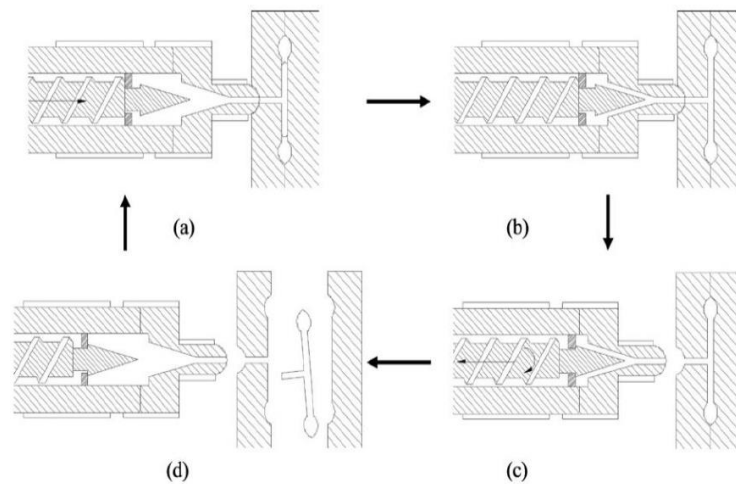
Cycle time, (a) Close mold, (b) filling, (c) compaction, (d) mold opening and extrusion.
